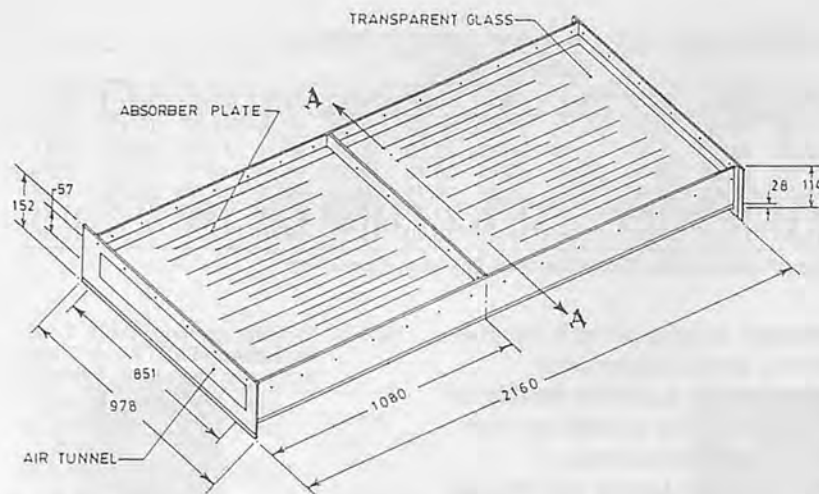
An isometric view of a flat plate solar collector (All dimensions are in mm).
